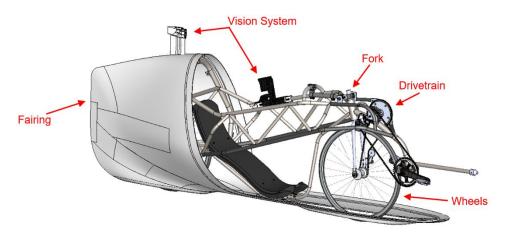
Assembly of vehicle's frame, wheels, seat, vision system, drivetrain, and fairing.
